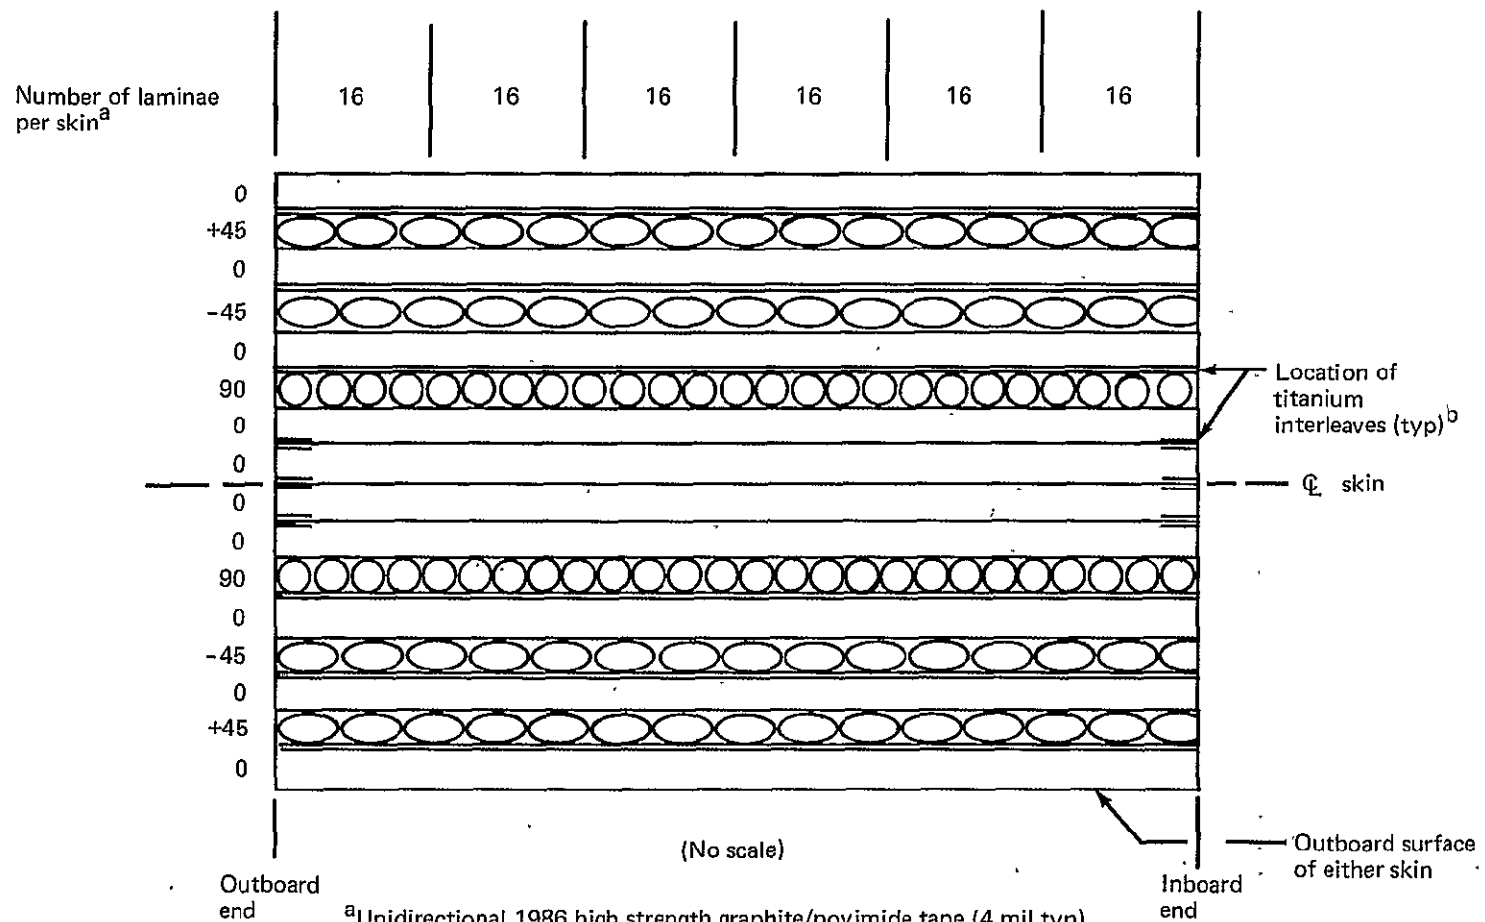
Composite Skin Layup Diagram, Minimum Gage, Lower Wing Panel
